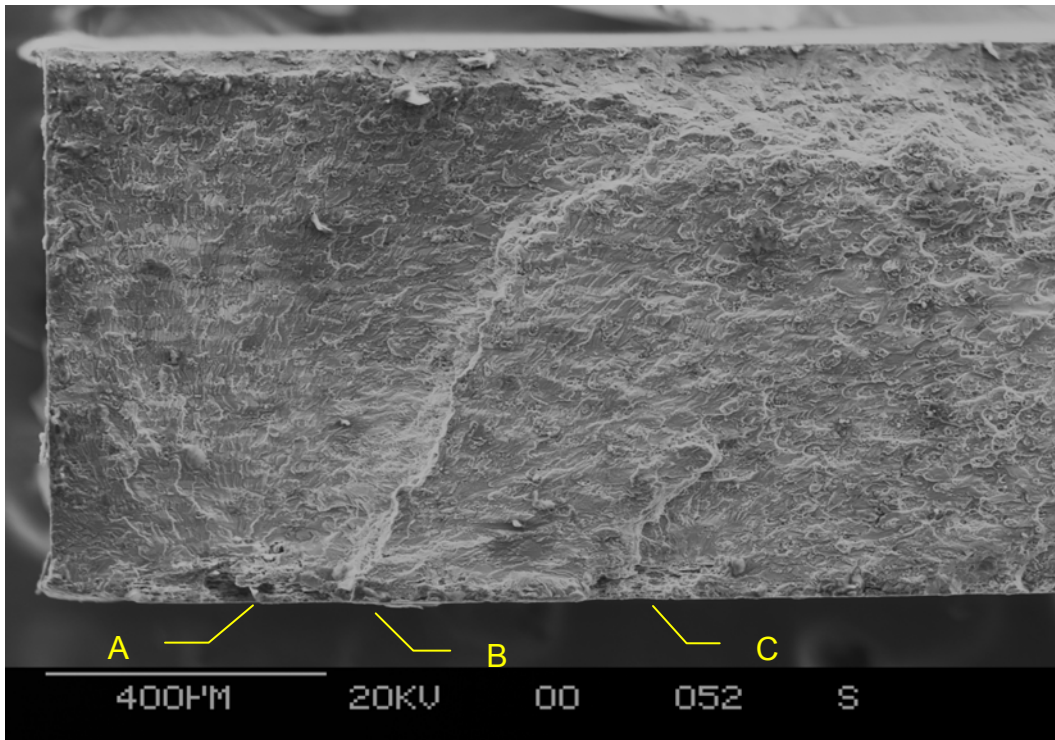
Fatigue Crack on Fracture Surface of Specimen 5967.
